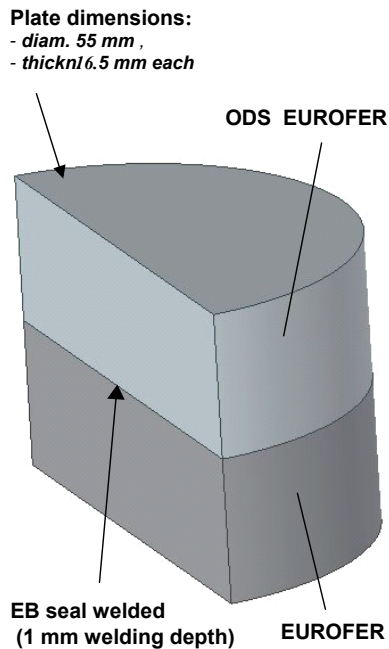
Specimen layout for HIP joining of ODS EUROFER with EUROFER.
